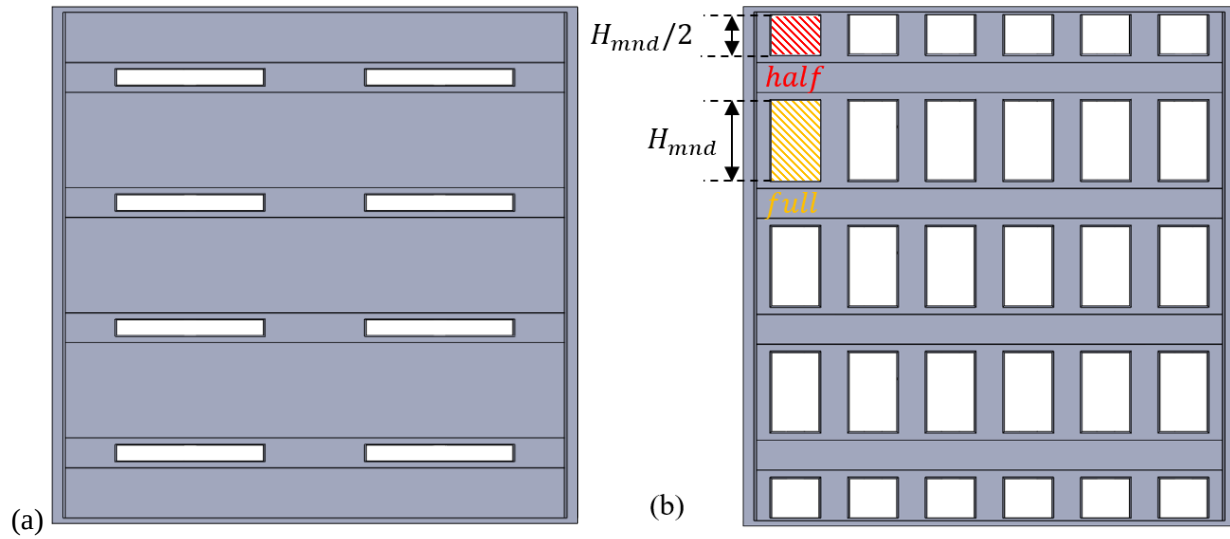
Manifold channels inlet opening: (a) hot side (b) cold side
